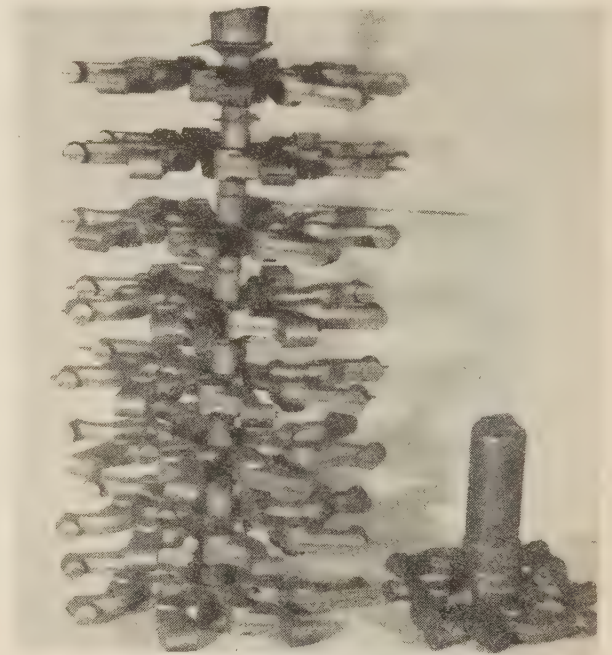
BRACKET CASTINGS MADE BY CENTRIFUGING IN ONE LAYER (RIGHT); AND BY STACK MOLDING IN EIGHT LAYERS
